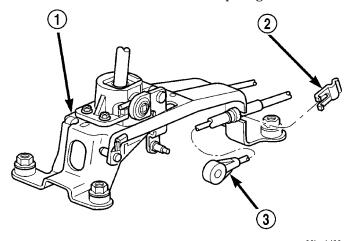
Gear Shift Cables and Bracket at Transaxle
